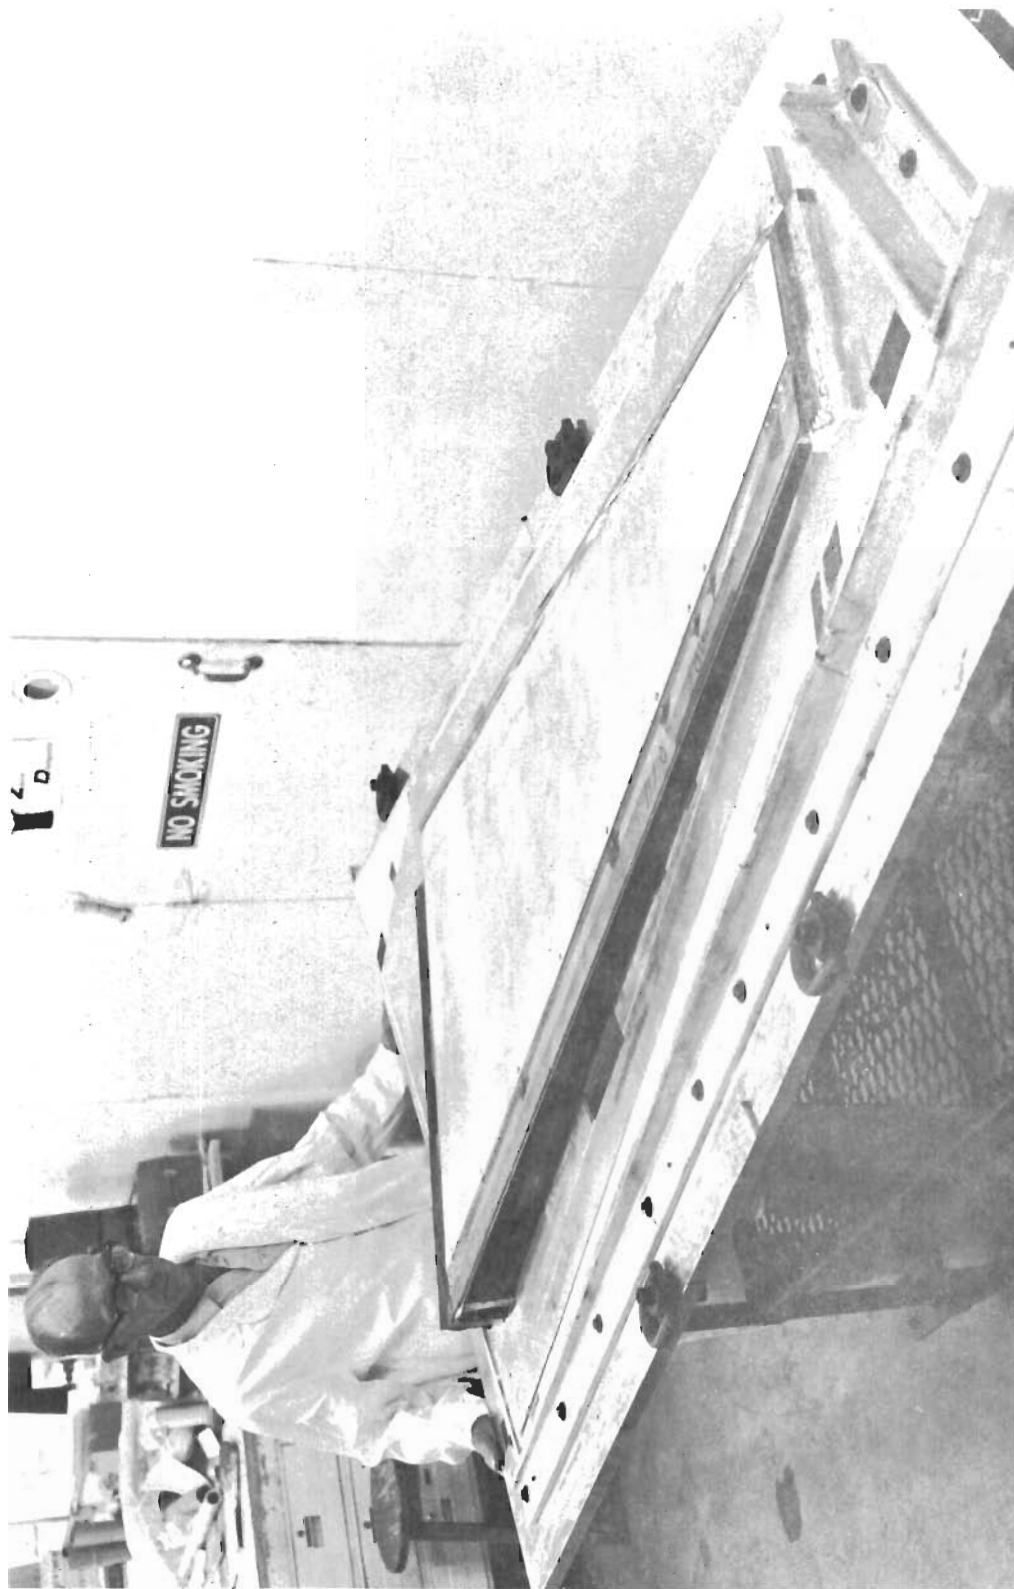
Rudder Trailing Edge Assembly and Bonding Fixture
